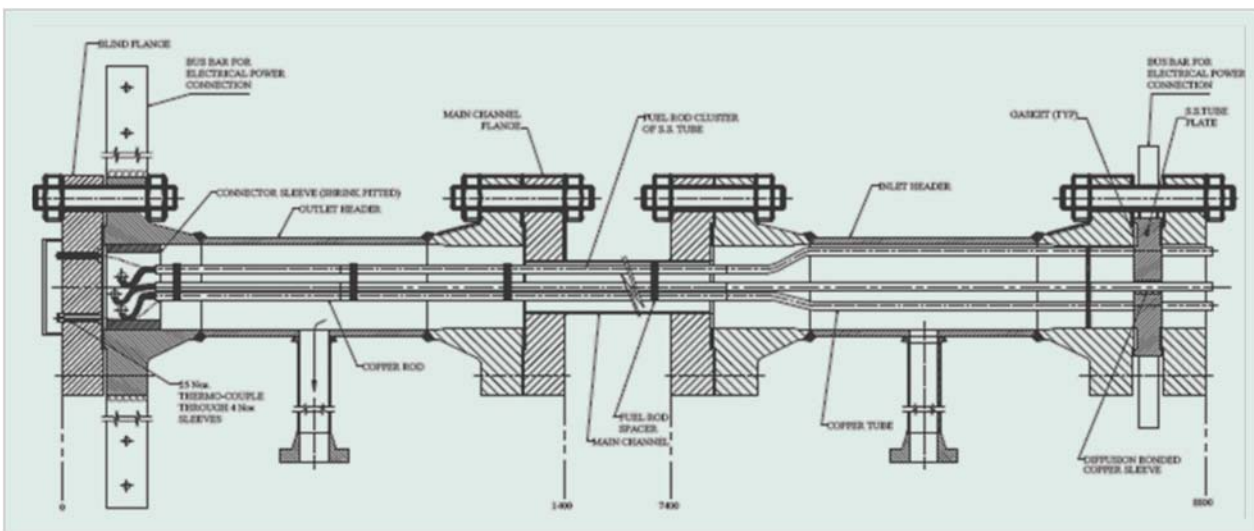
Cross-section of Fuel Rod Cluster Simulator Assembly
